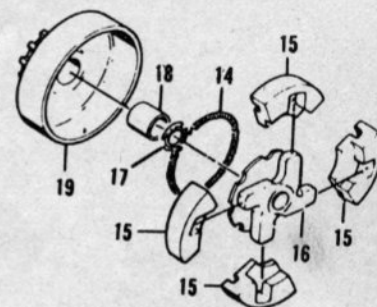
Exploded view of clutch used on early direct drive models except SP125 and SP125C. Later models are similar.
